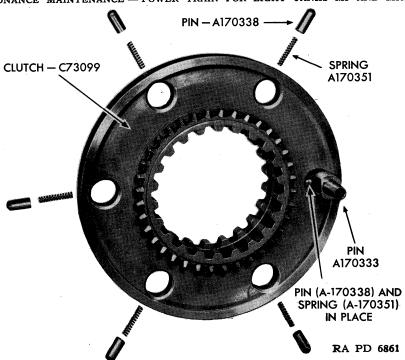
Parts of fourth and fifth gear clutch with pins and springs
